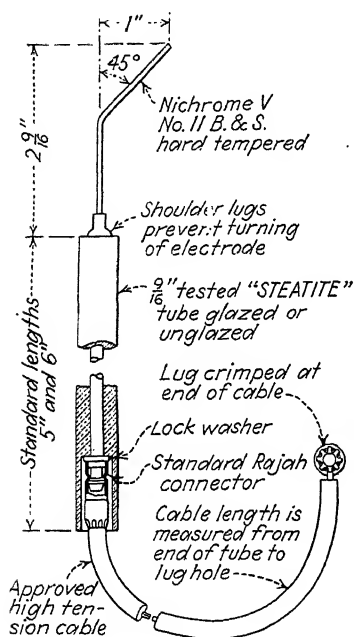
Details of ignition electrode, insulator, and high-tension cable. Connector joining cable and electrode is recessed into insulator tube. (Courtesy of Dielectric Products Corporation.)
